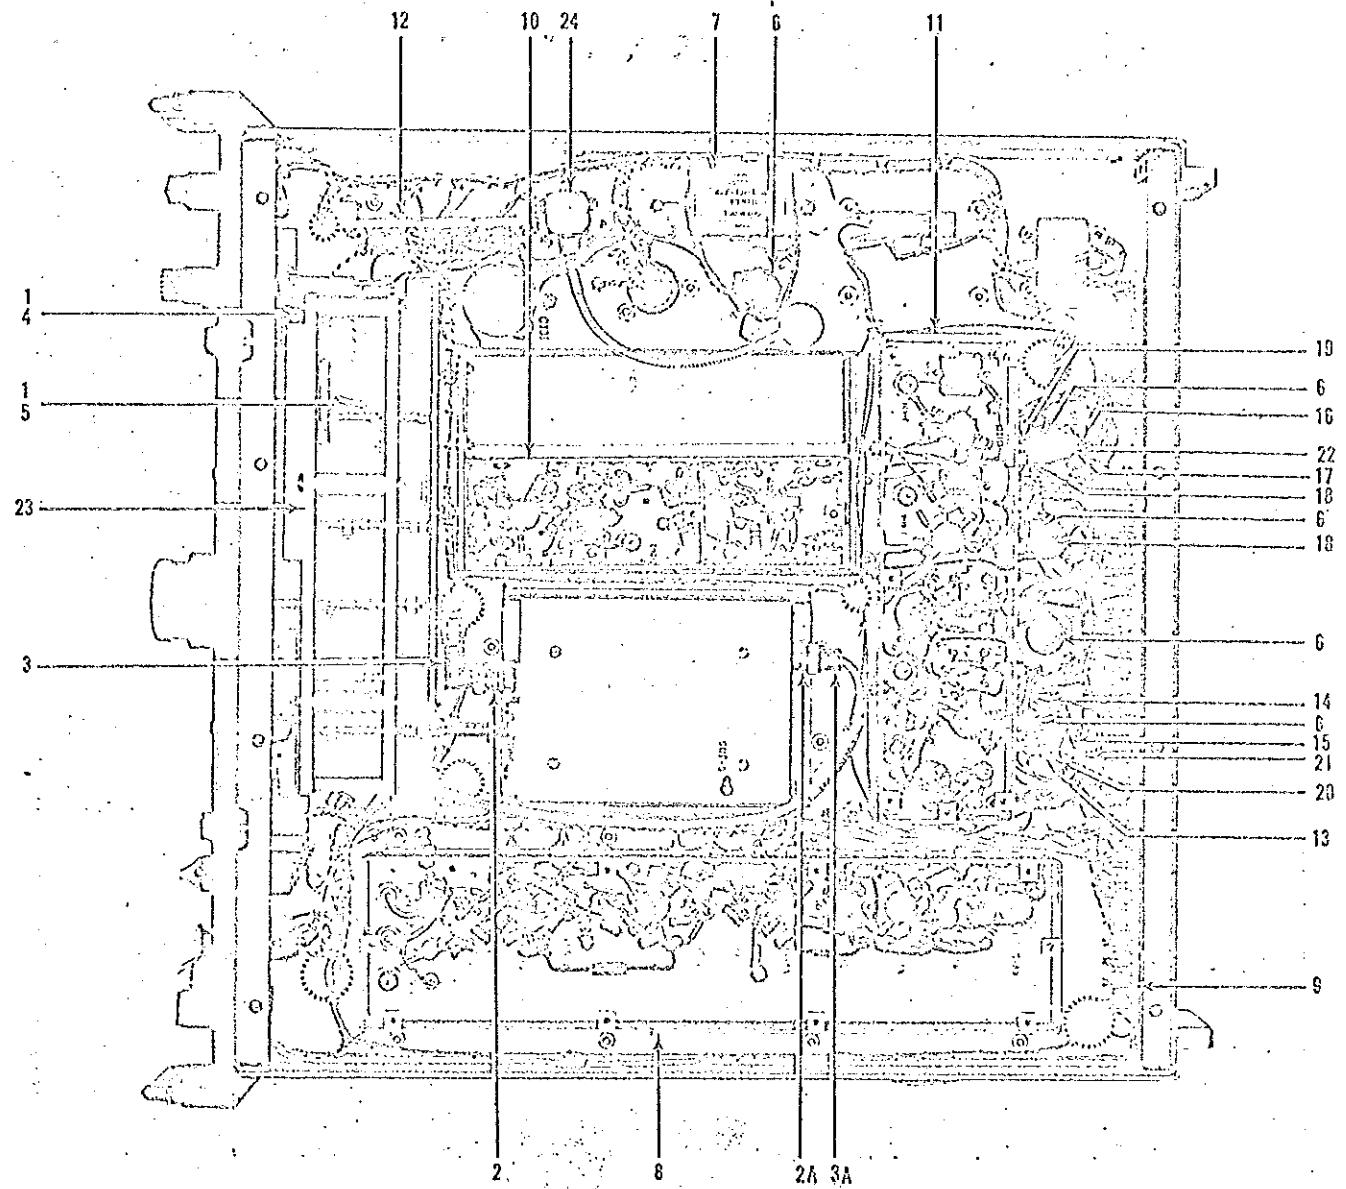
UHF Receiver, Model G166D, Bottom View
